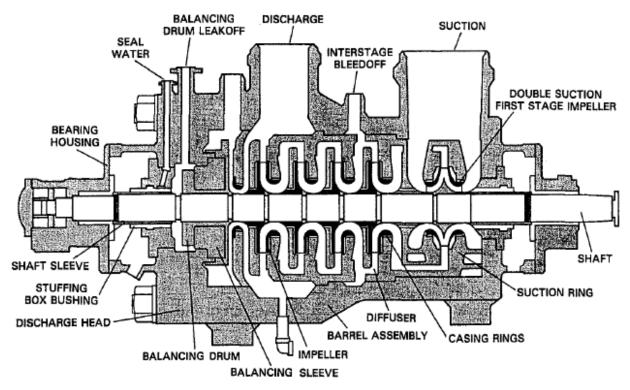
Boiler feed pump—double case barrel pump, double-suction first-stage impeller, and multistage centrifugal type.
